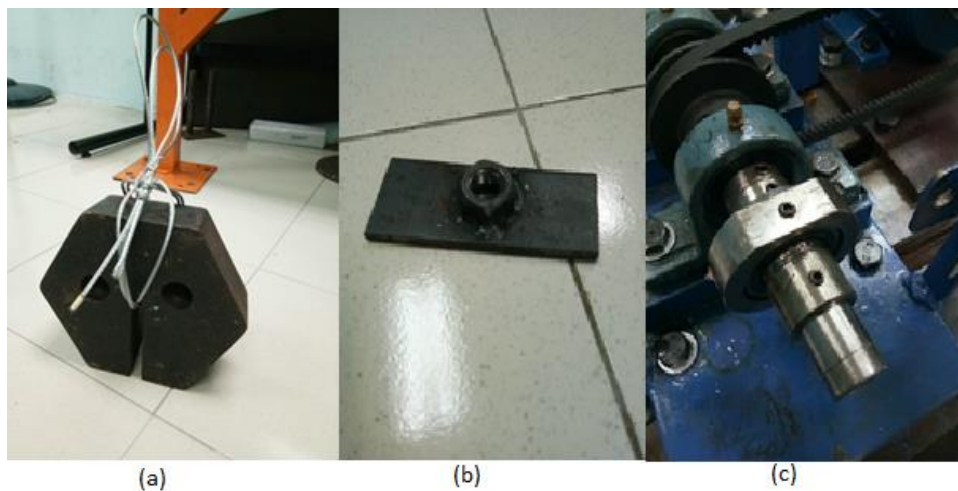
(a) 10 kg load tied by steel rope, (b) nut lock, (c) shaft with bearing and bearing sleeves
